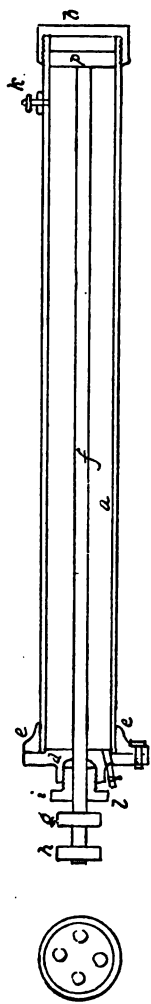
SECTION OF HYDRAULIC BUFFER.
